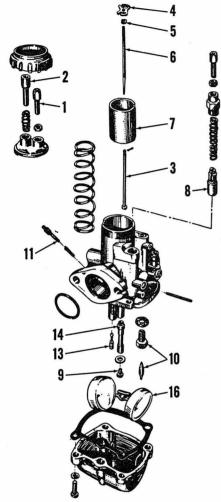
Exploded view of Mikuni VM carburetor used.
